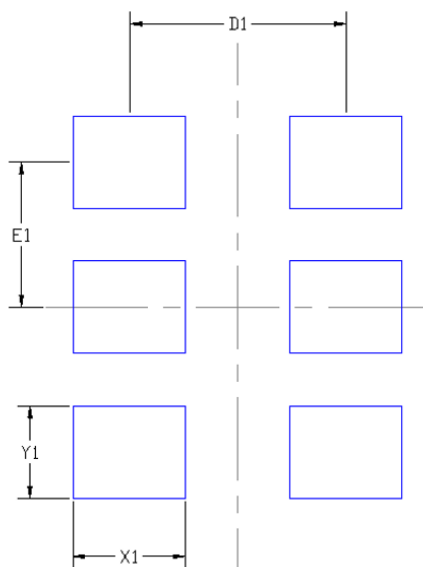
Si540 (2.5×3.2 mm) PCB Land Pattern
